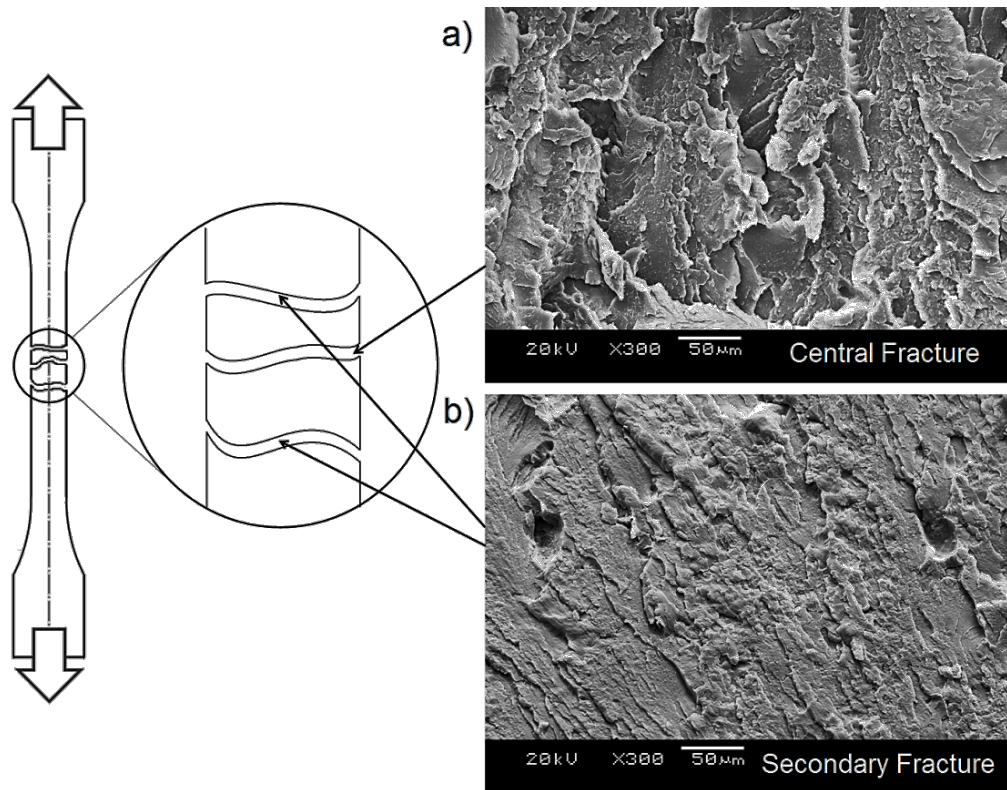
Fracture surfaces from tensile testing; a) central fracture, b) secondary fracture
